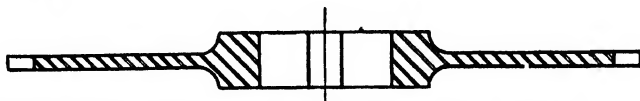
A cutting tool with a very narrow cutting edge with a thick hub. When quenched the cutting edge will often warp or buckle.
